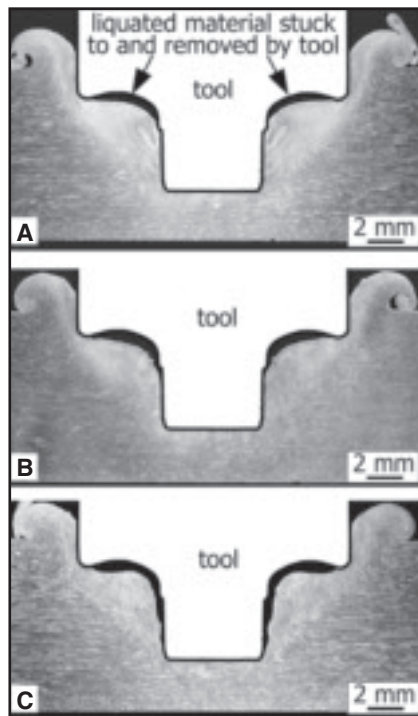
Increasing removal of liquated material from 2219 Al by tool with increasing tool rotation speed. A — 1500 rev/min; B — 2000 rev/min; C — 3000 rev/min. The area of gap between tool and weld represents material removed.
